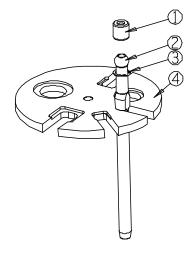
Install Valve Bushing onto Valve Stem (Note: Install Snap Ring on Stem prior to installing Bushing).
